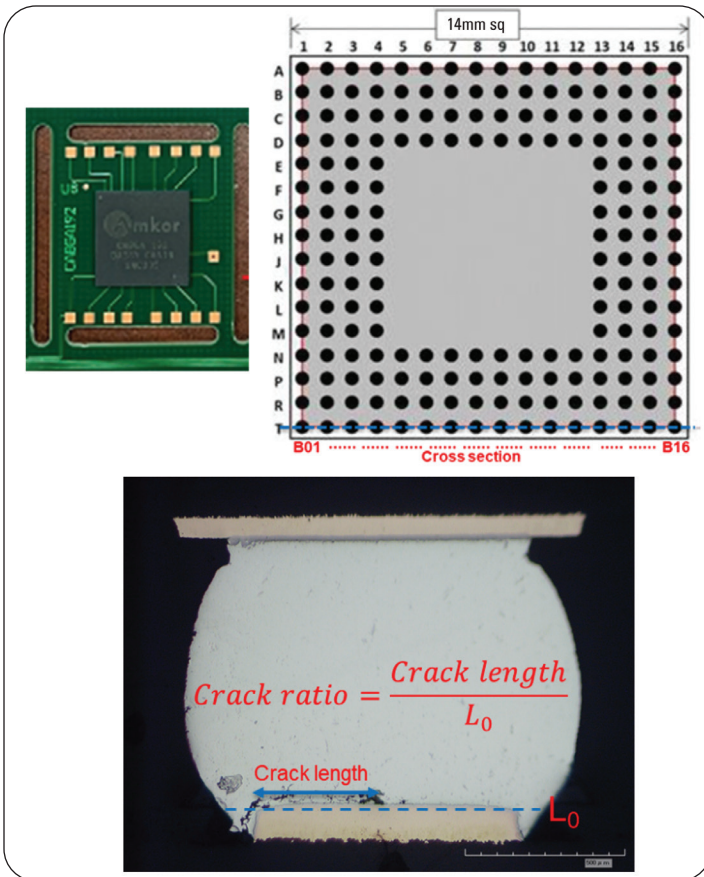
Schematic drawing shows the location of the cross sections examined for CABGA192 and the crack ratio calculation.
